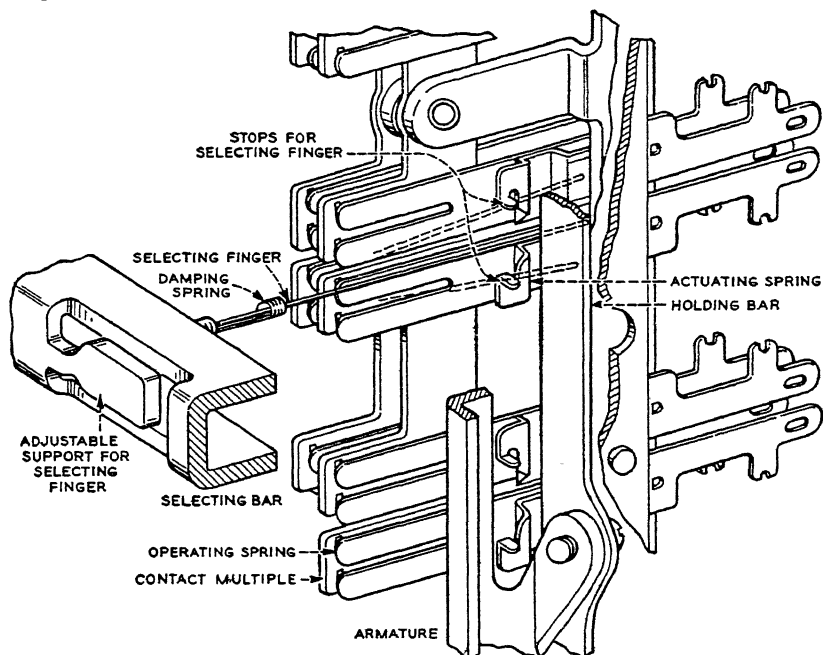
Crossbar Switch Selecting Mechanism—Crossbar System (Courtesy Bell System)
